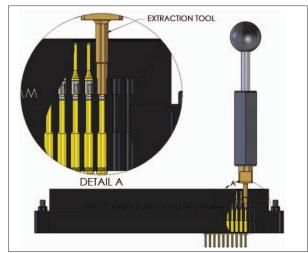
Figure C. Ensure that the tool is kept perpendicular to the module face to avoid damage to the contact or tool.
